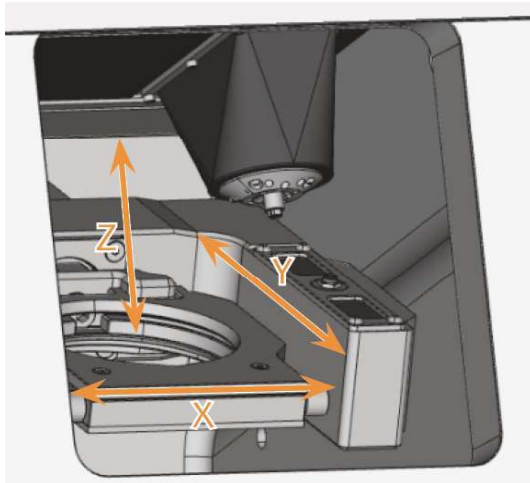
PROGRAMILL DRY: LINEAR AXES
